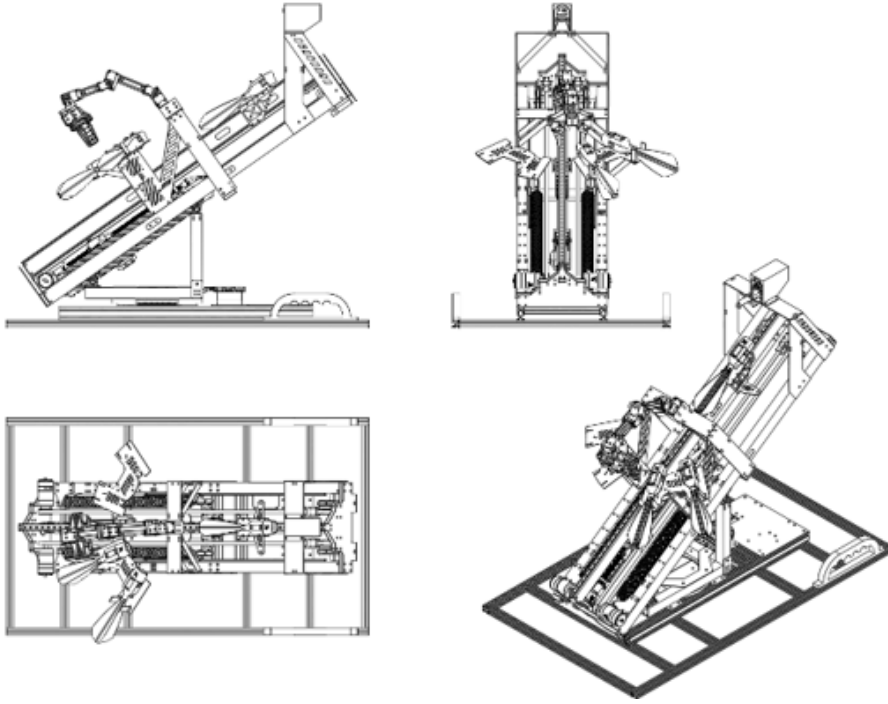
Complete mechanical CAD assembly from multiple viewing angles, detailing the integration of the robotic arm, friction-wheel launcher, and the underlying aluminum extrusion chassis.
